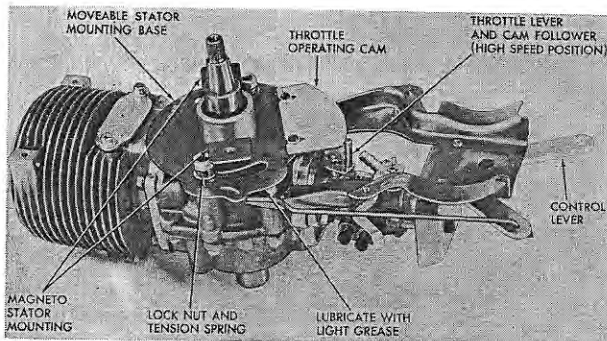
On some models, ignition timing is adjustable and synchronized with throttle as shown.
